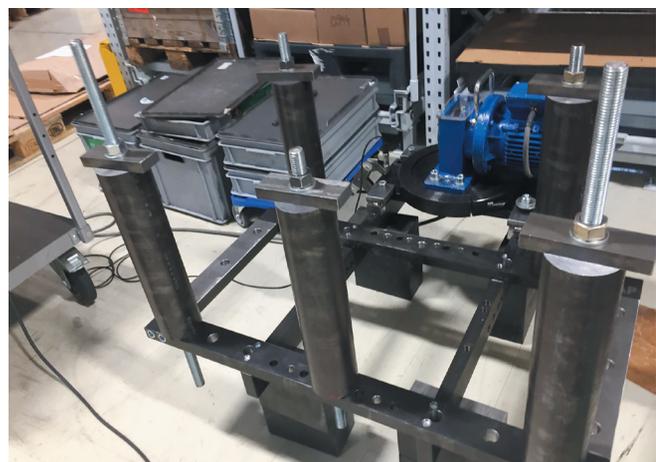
Six cylindrical pipes on one multiple clamping jig, August 2017 (hpw)
